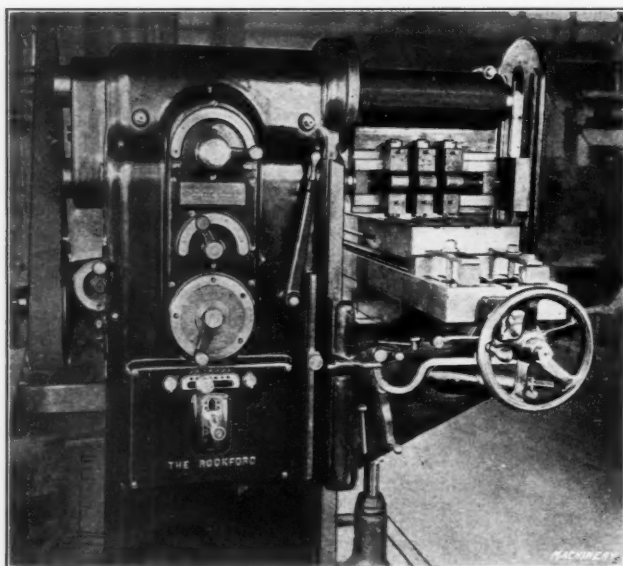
Attachment fitted to a Rockford Milling Machine for milling Three T-slots at One Setting
